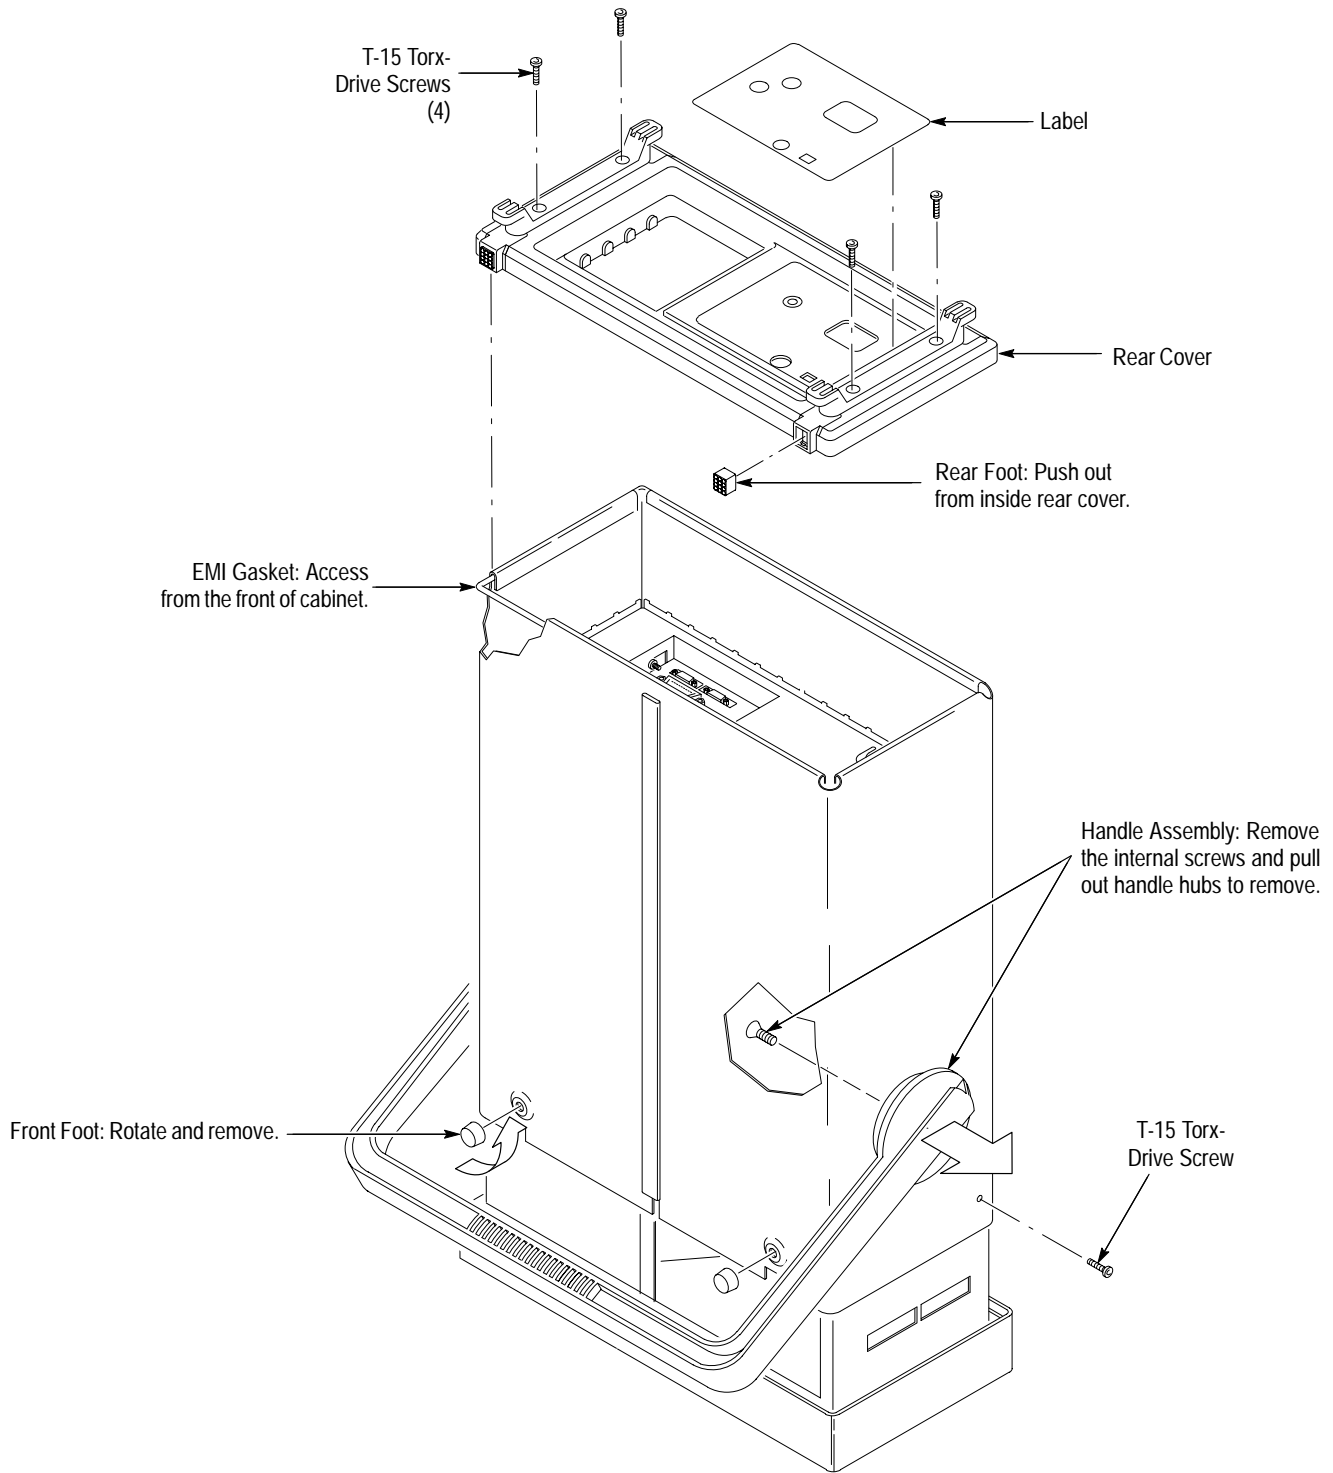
Front Cover, Rear Cover, Cabinet, EMI Gasket, and Cabinet Handle and Feet Removal
